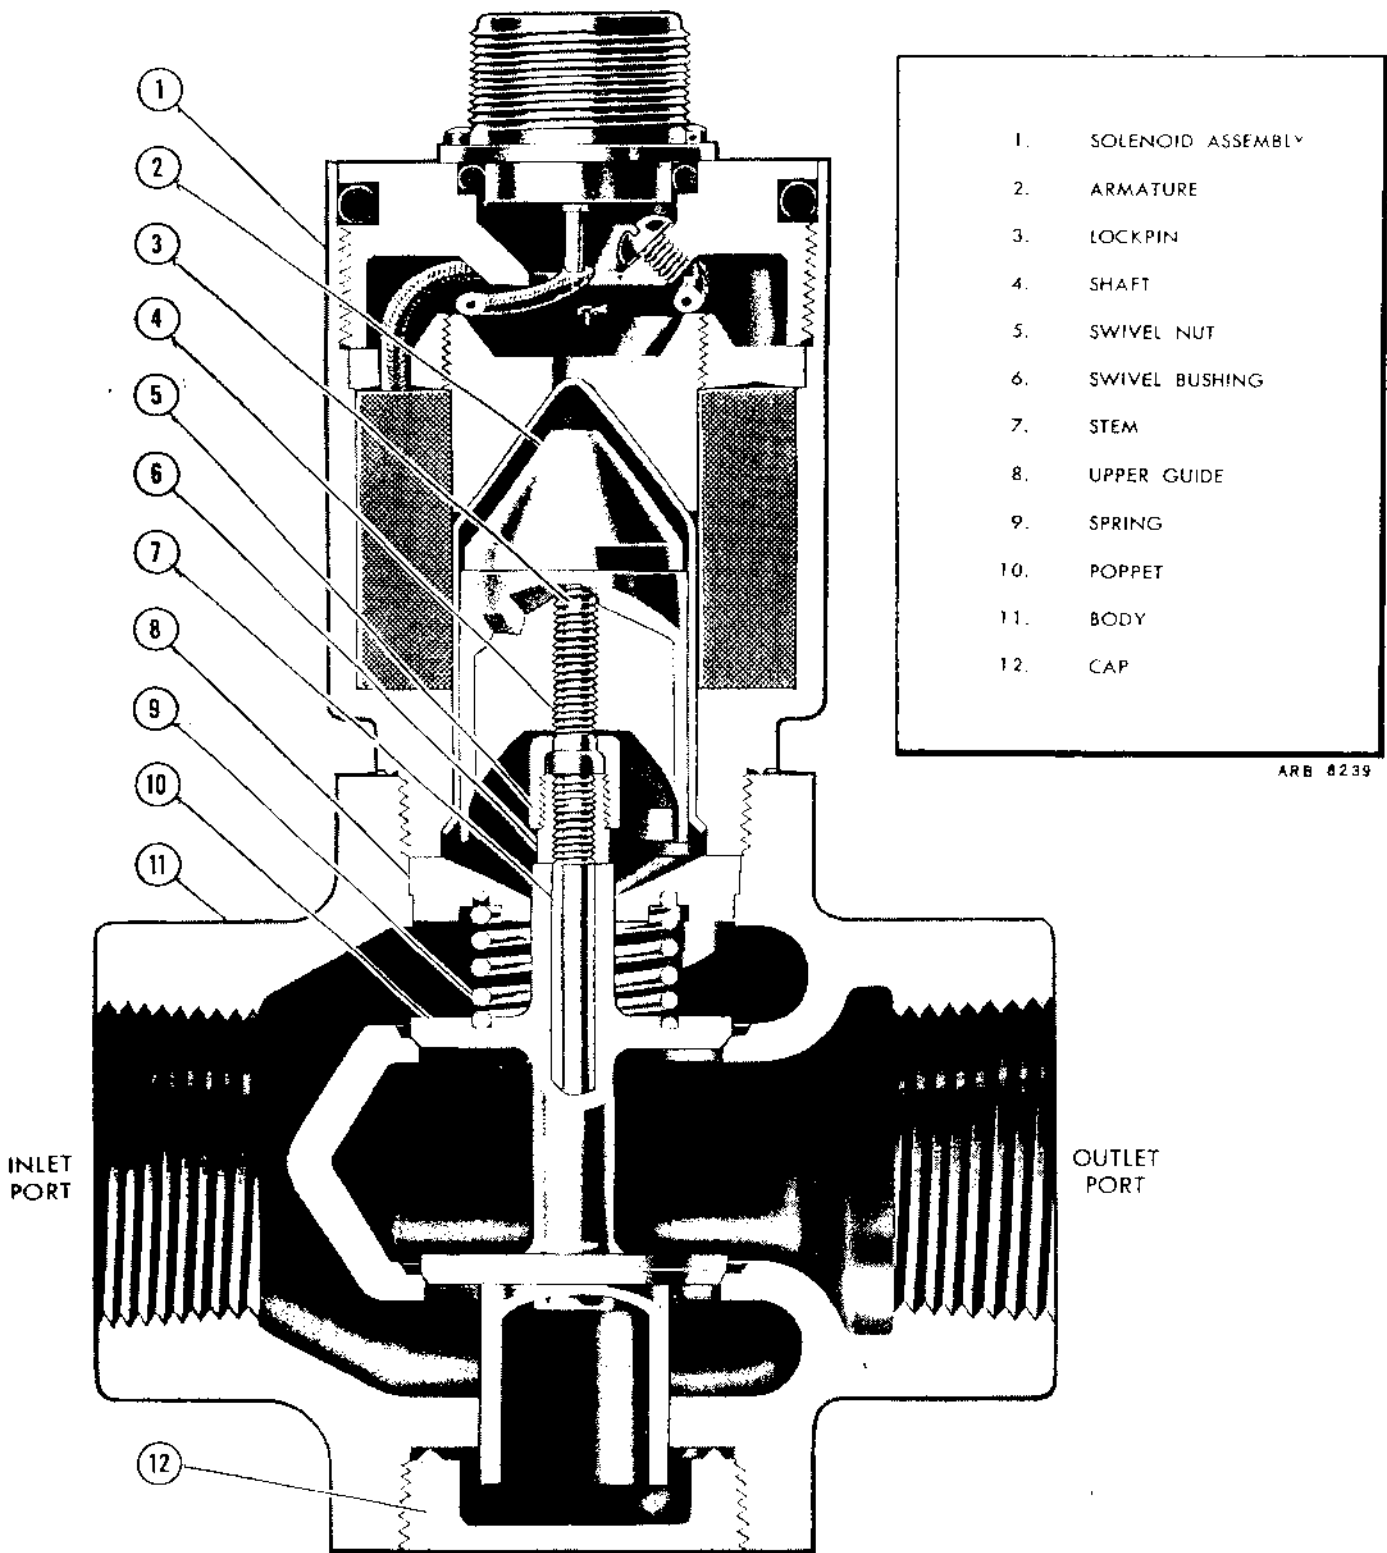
Fuel Bypass Solenoid Valve, AF Serial No. 44-85467 and Subsequent
